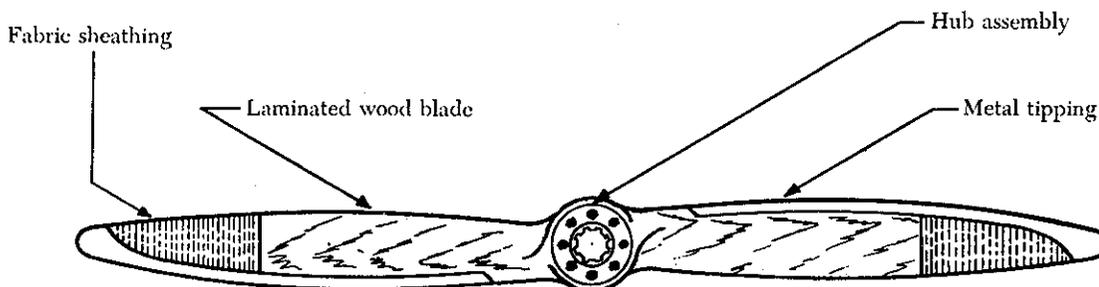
Fixed-pitch wooden propeller assembly.
